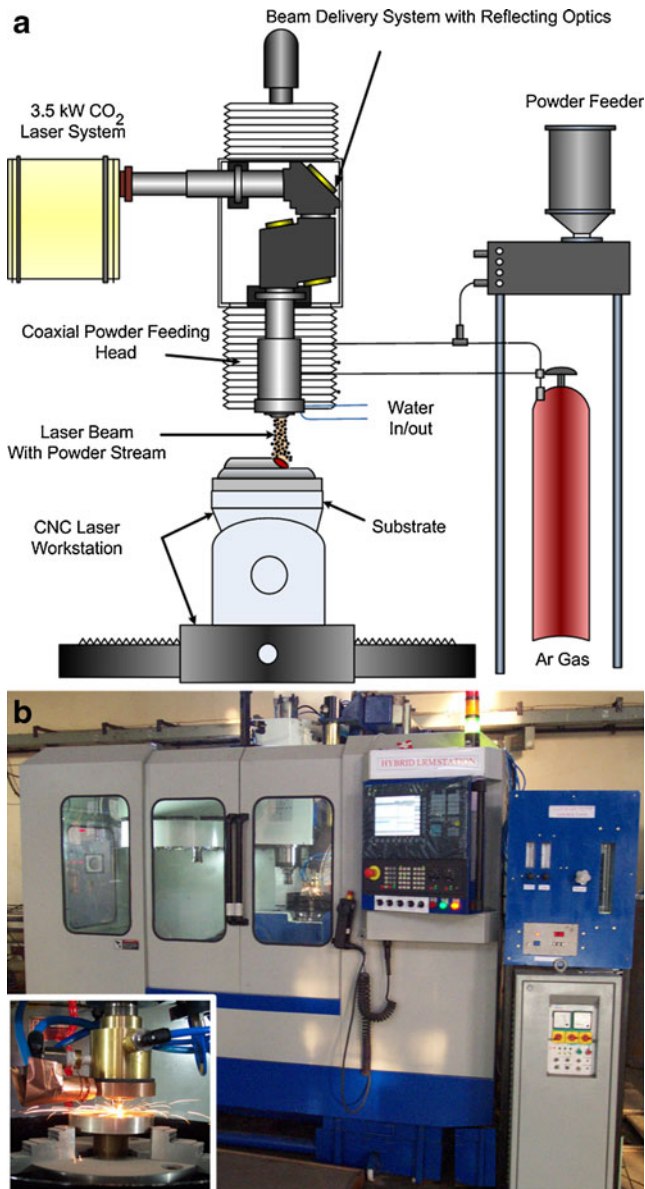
a Schematic arrangement of laser rapid manufacturing setup. b Photograph of laser rapid manufacturing setup with co-axial processing head in inset
